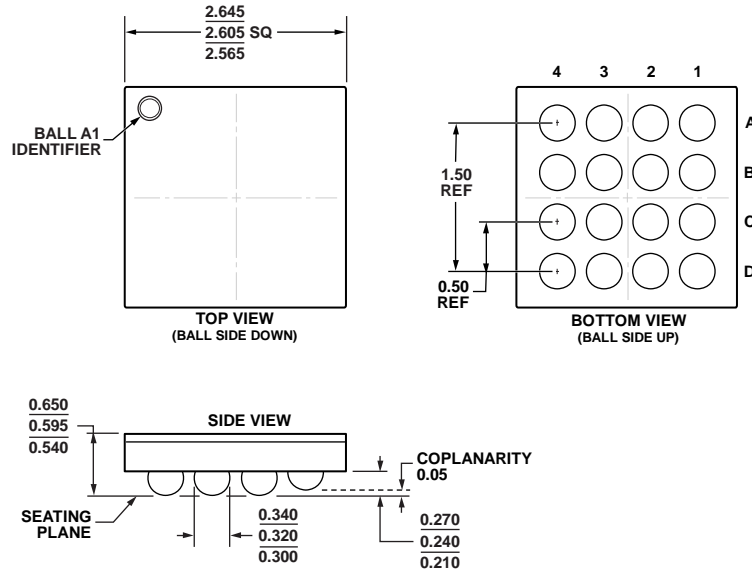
16-Ball Wafer Level Chip Scale Package [WLCSP] (CB-16-16)
